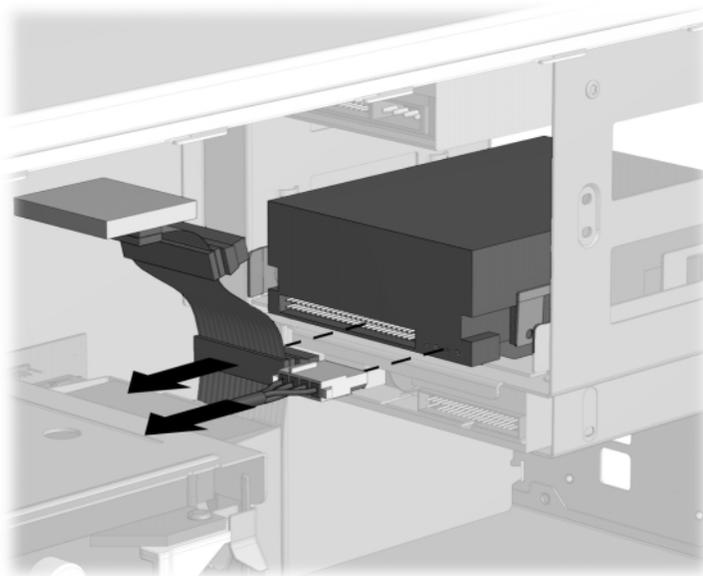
Disconnecting the SCSI signal cable and power cable
